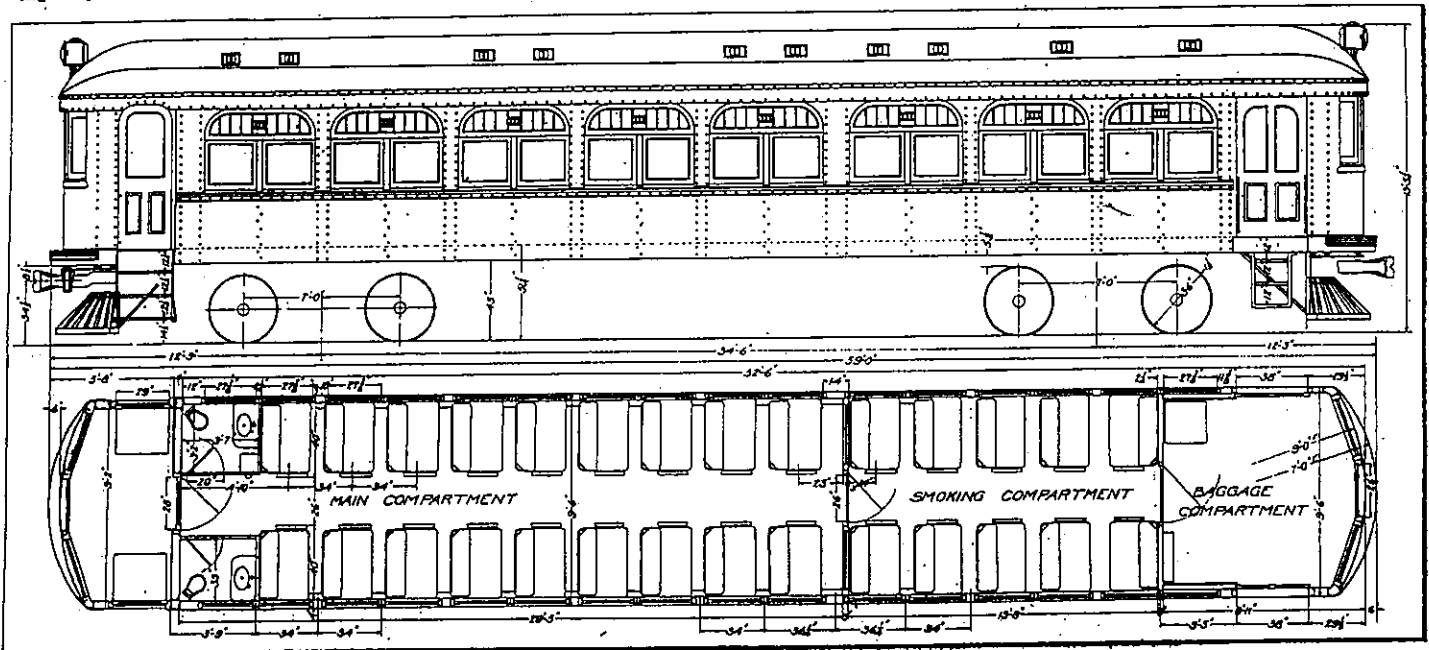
Plan and Elevation of All Steel Motor Cars for London & Port Stanley Railway.
